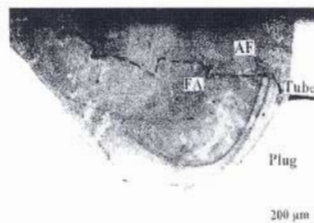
Cross - section of a sound end plug weld made at laser power 2 kW and welding speed=25 rpm. Laser beam was displaced by 0.25mm from fuel clad tube / end plug interface.
